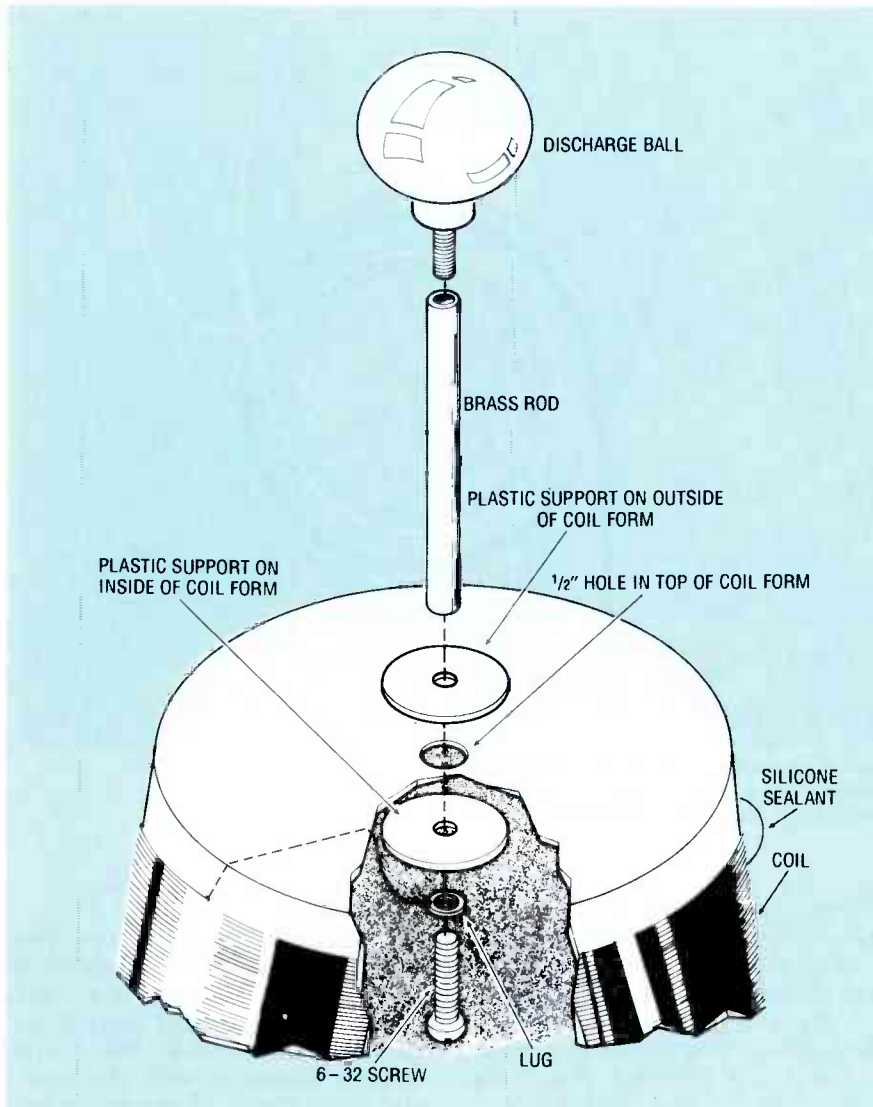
THE DISCHARGE BALL is a brass-plated metal doorknob, 1-inch in diameter. The ball is mounted on a 4-inch brass rod that's been tapped to make mounting the ball easier.
